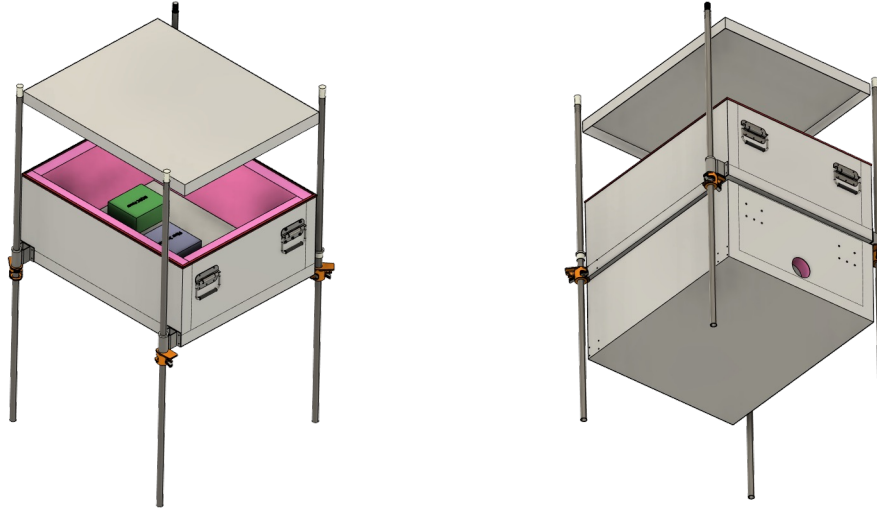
FieldHub enclosure CAD drawing. Left: top view of insulated electronics enclosure, with lid open. Right: bottom view, also showing cable slack box.
